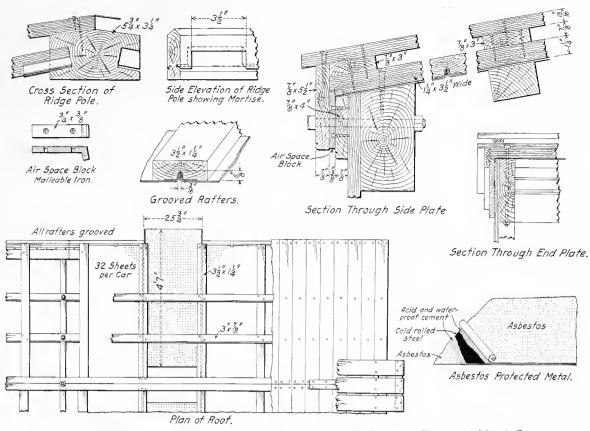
Murphy's Improved Winslow Car Roof. Murphy's American Car Roof. Outside Metallic Roof. Standard Railway Equipment Co.
